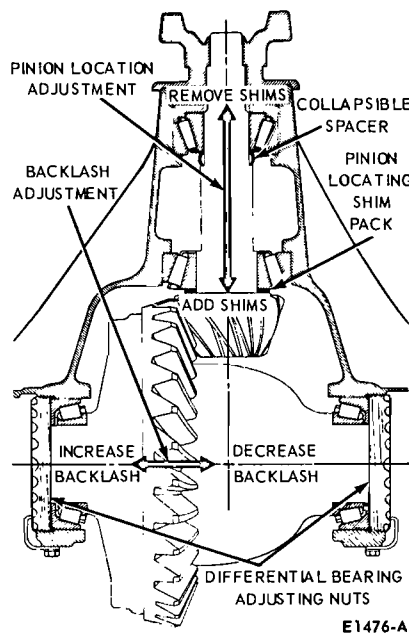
Pinion and Ring Gear Tooth Contact Adjustment—Integral Carrier Type Axles
